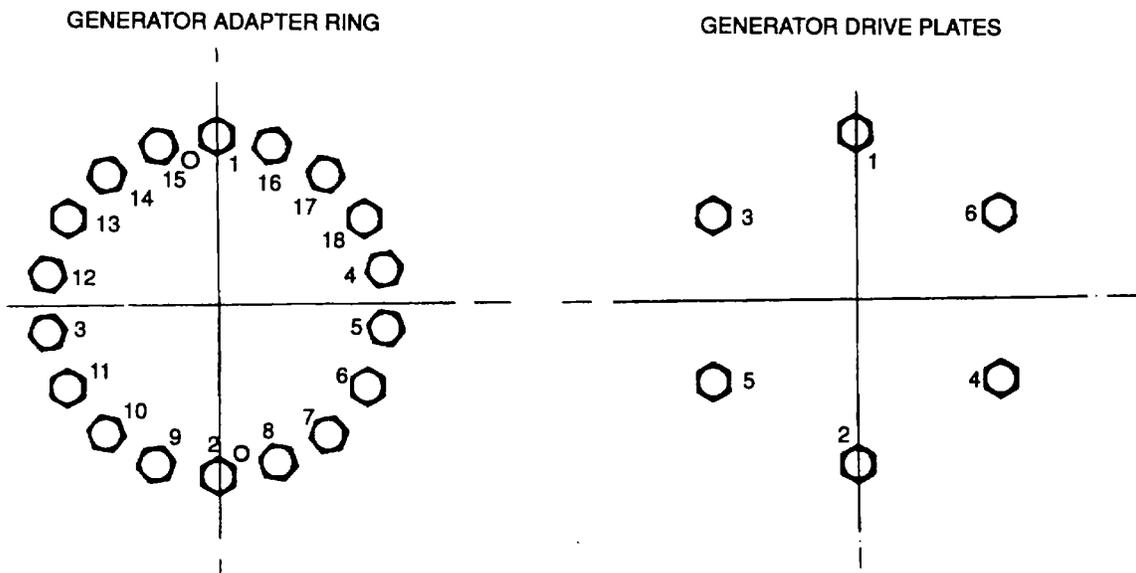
Generator G1, Torque Sequence of Adapter Ring and Drive Plates (Flexible Discs)
